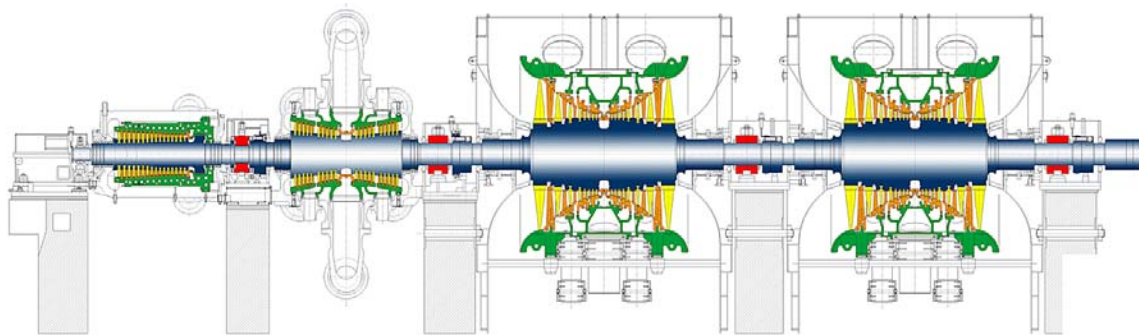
Cross section drawing of Mehrum Steam Turbine – all coloured parts were exchanged
